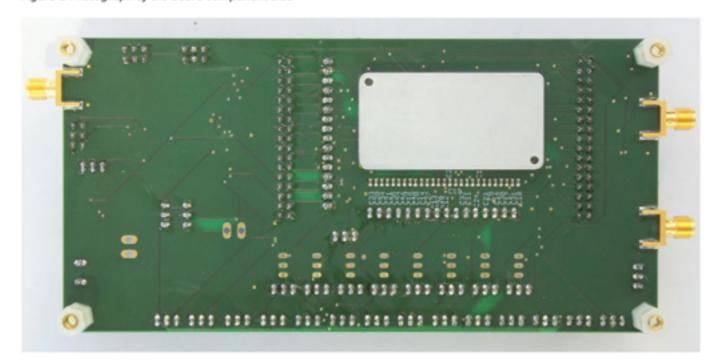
Photograph of the board ASIC side. The IDE1180 is below the cap.
